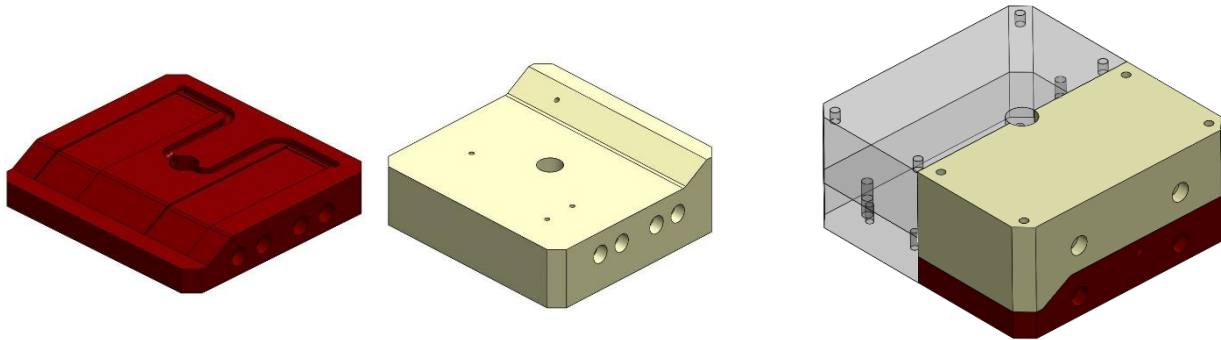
Original moulding inserts (left) and moulding inserts reduced to half (right).
